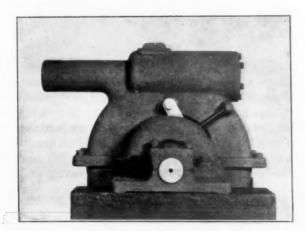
Exterior of Case to be Photographed on Same Plate with Fig. 12
